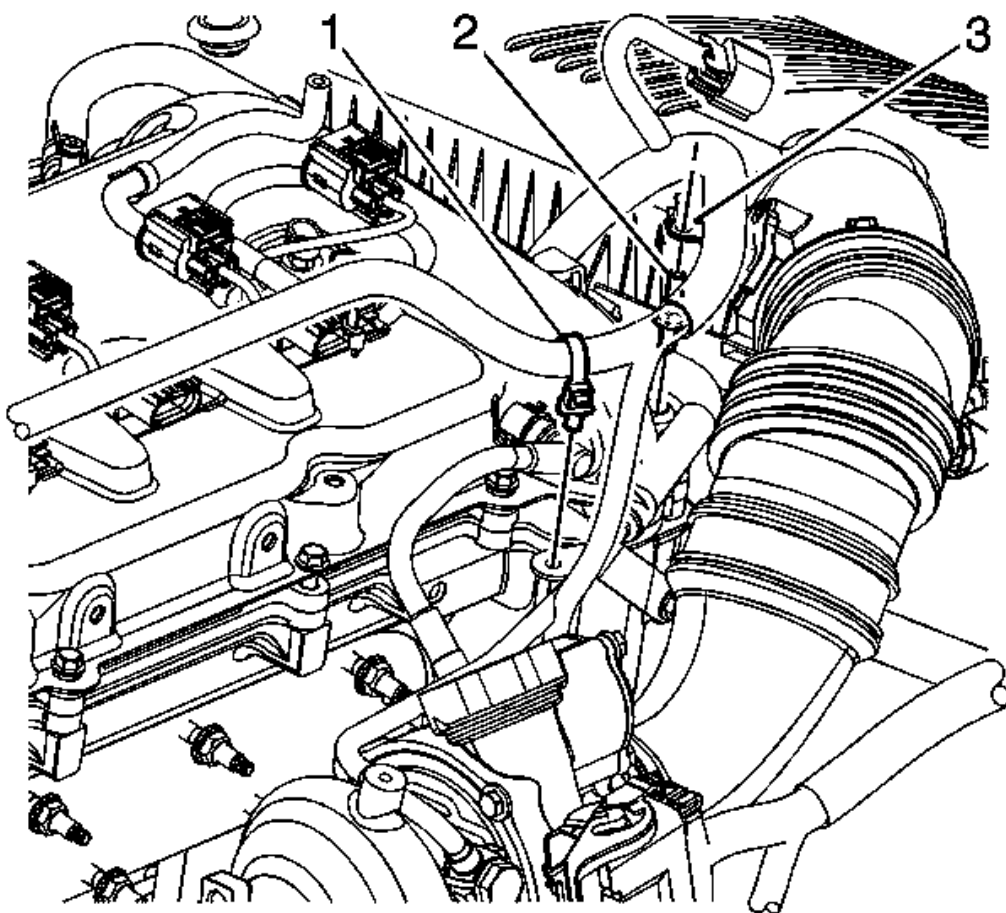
View Of Turbocharger Coolant Feed Pipe Clips & Studs
